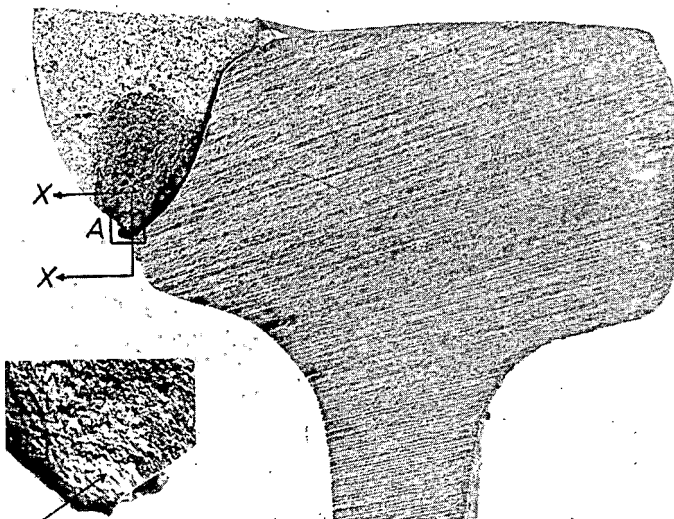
SECTIONS OF CRACKED WHEEL FLANGE AND WORN HIGH RAIL
